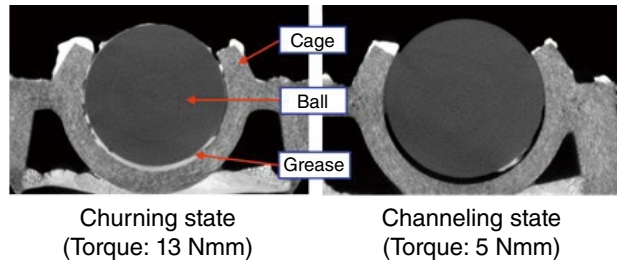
State of grease adhesion in resin made bearing (between ball and cage pocket surface)
